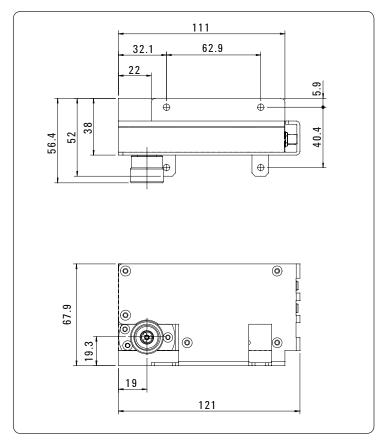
Option E4991A-010 test head dimensions (in millimeters, nominal)
